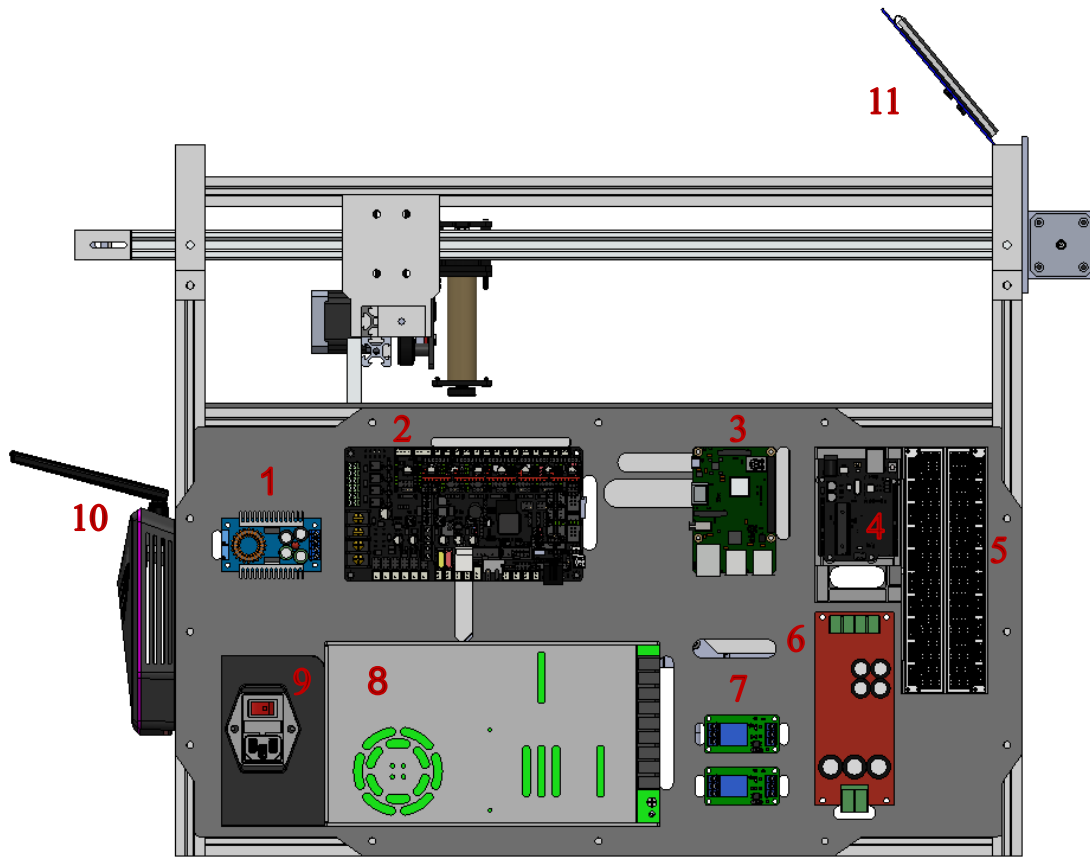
Left-Hand Side View of Printer Assembly Detailing Electronics Mounting Plate
